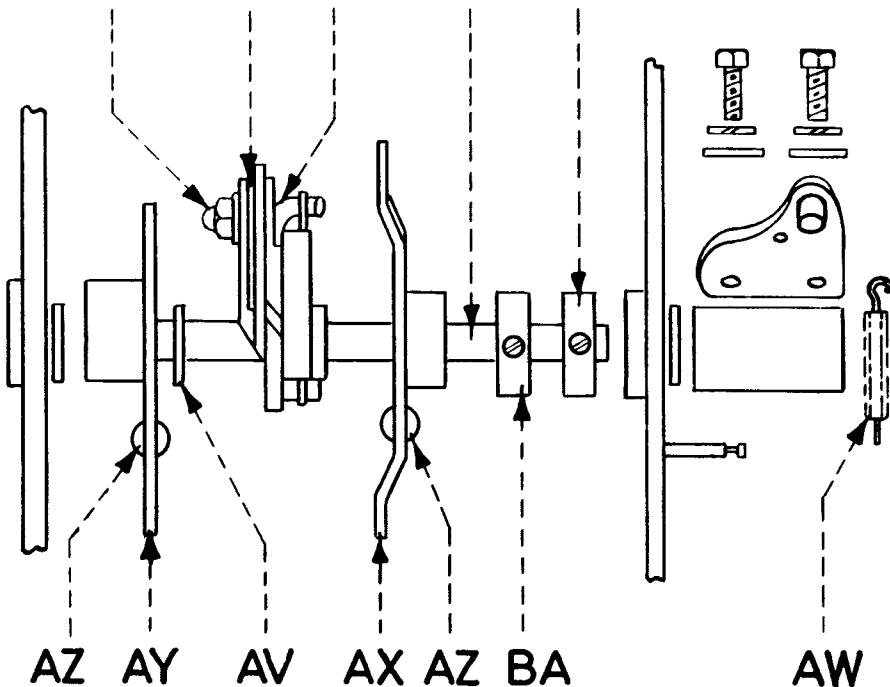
DETENT CONTROL SHAFT (EXPLODED VIEW)
